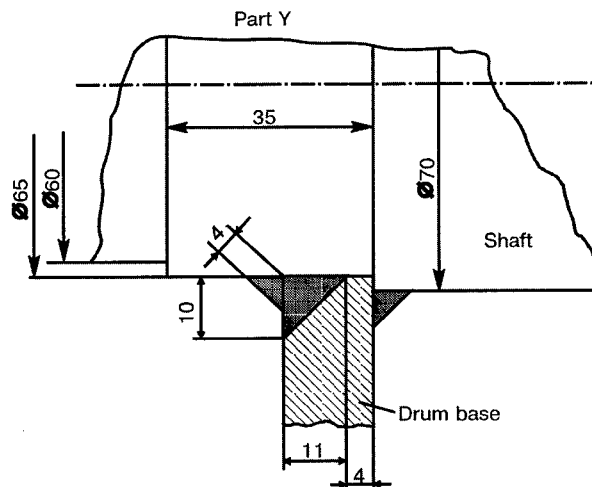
Circumferential connecting welds between the shaft and the drum base
